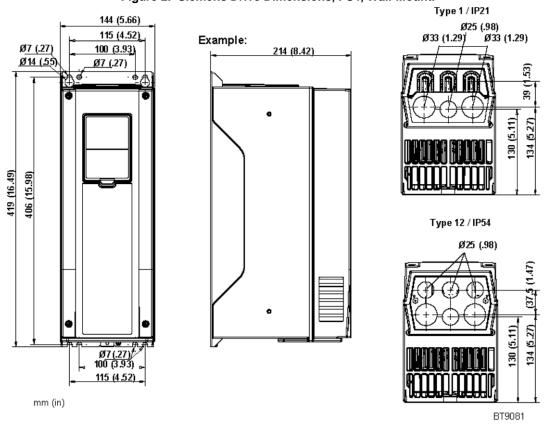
Siemens Drive Dimensions, FS5, Wall-Mount.
